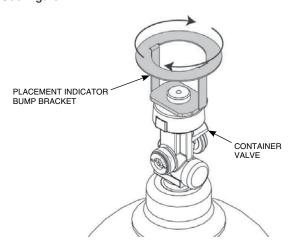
PLACEMENT INDICATOR BUMP BRACKET INSTALLATION
